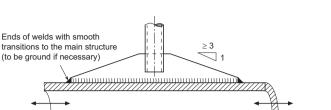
Ends of secondary members welded on to the main structures
